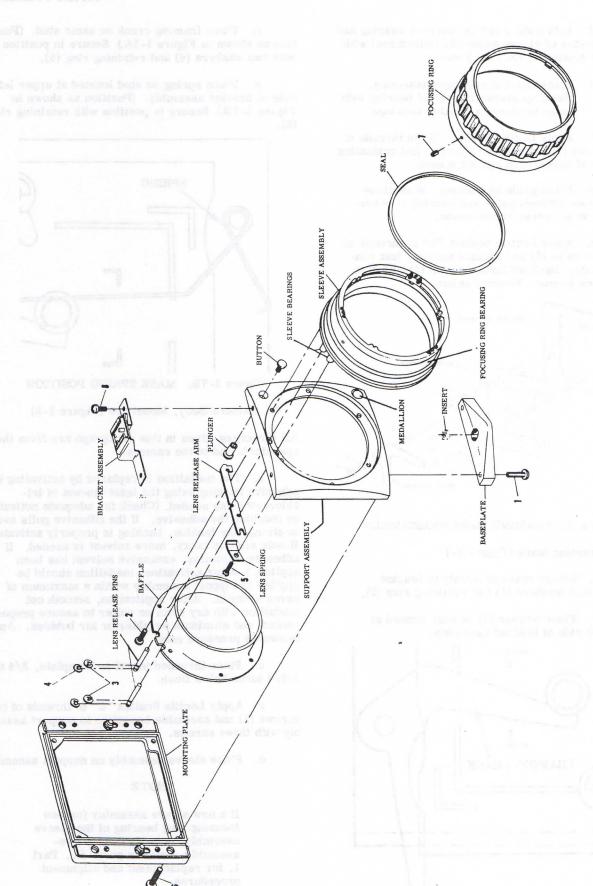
, MODEL xlw CAMERA BODY REASSEMBLY
